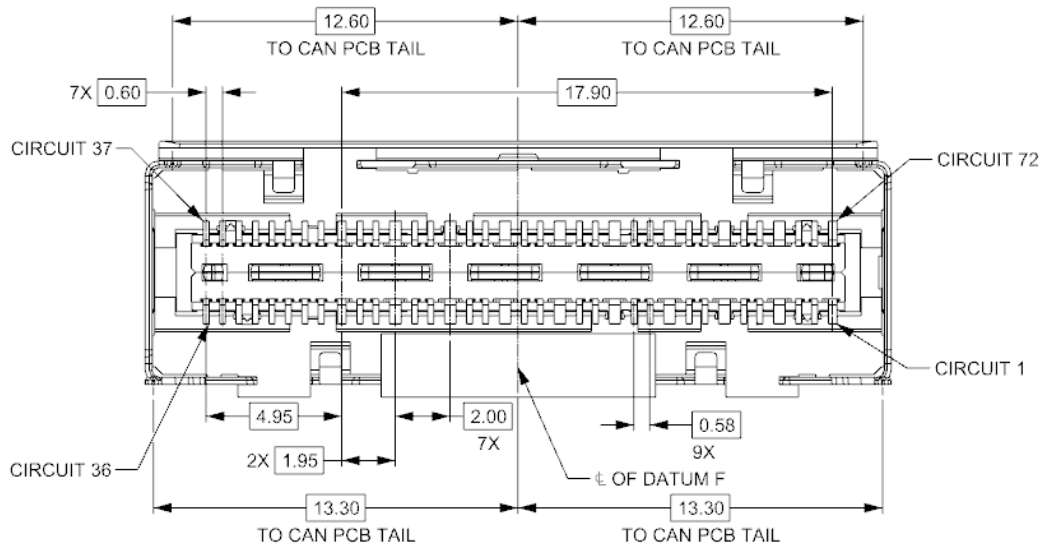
Bottom View of Fixed-Side Connector (2 of 2)
